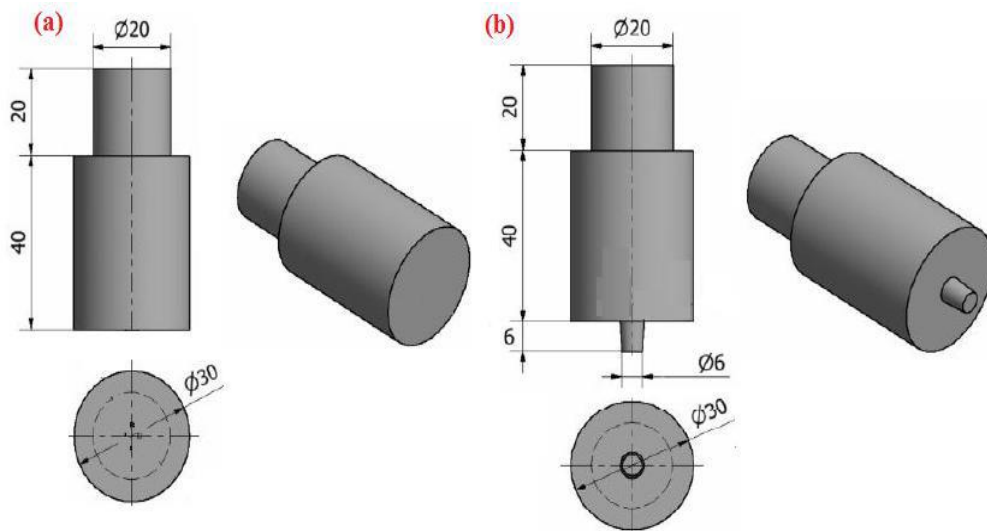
Tools used in the study (a) Pin less FSP tool (b) FSW tool with cylindrical pin profile
